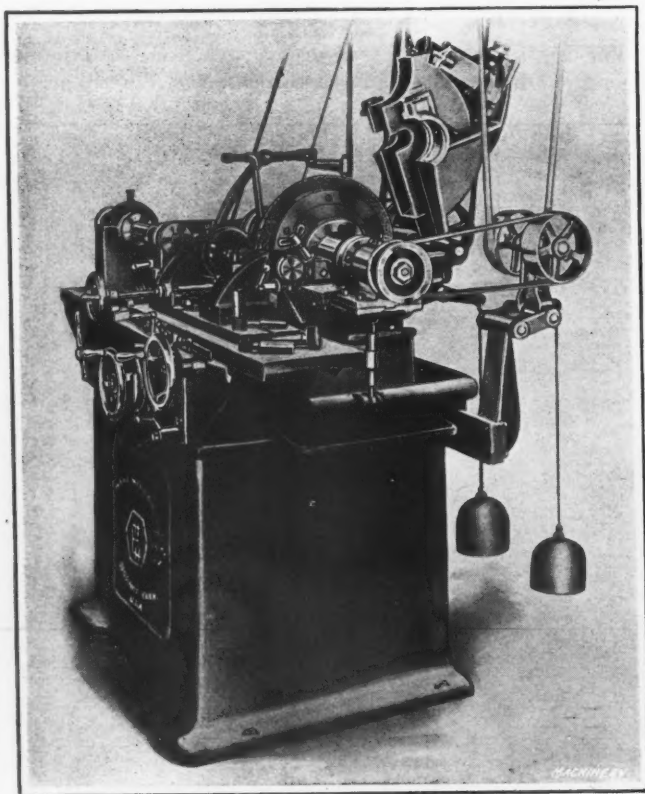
Thread Grinding Machine built by the H. E. Harris Engineering Co.
